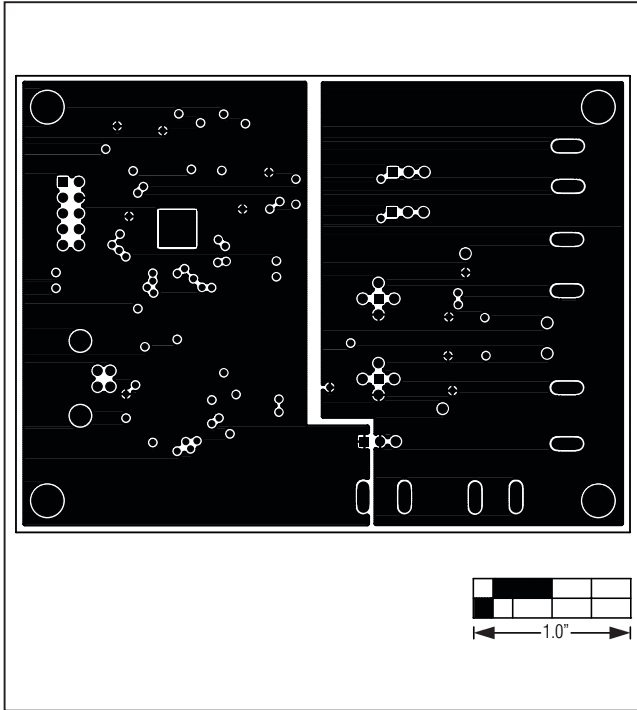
MAX9611 EV Kit PCB Layout—Inner Layer 3
